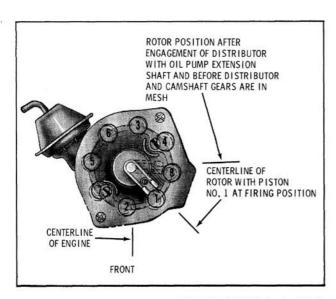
Spark Plug Wiring (30-31-32 & 33 Series V-8)
